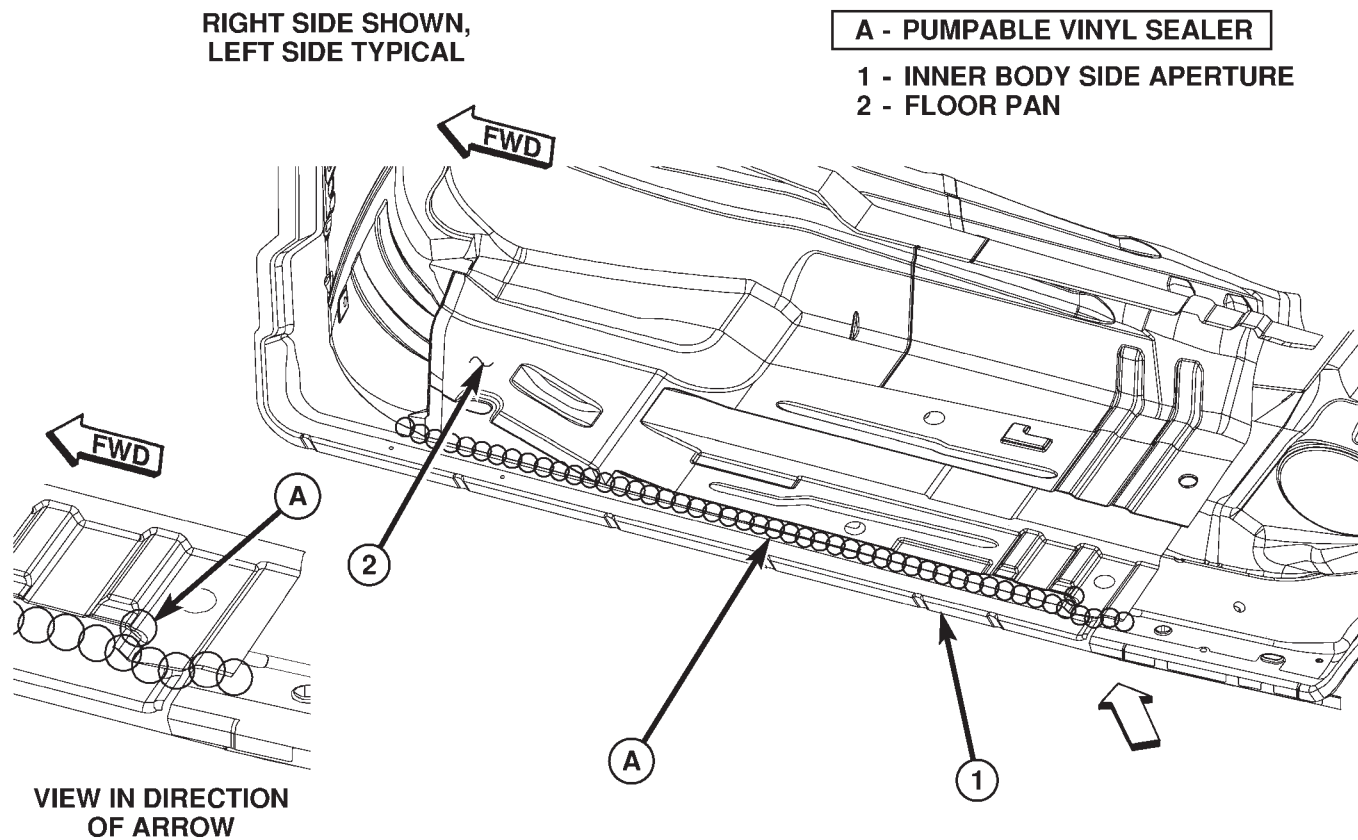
FRONT FLOOR PAN/CENTER FLOOR PAN
